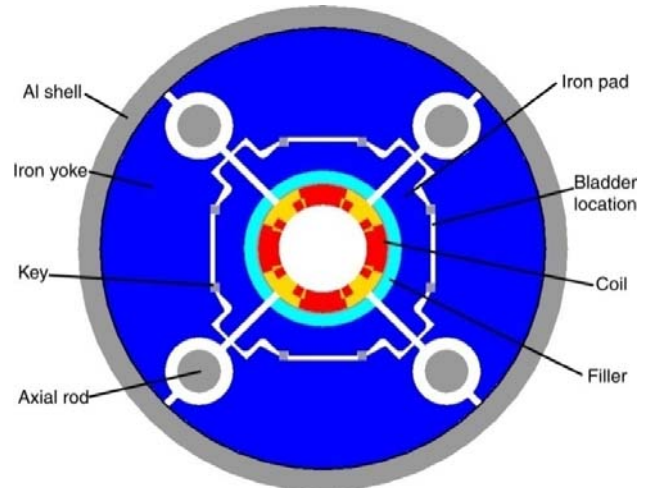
TQS magnet cross-section showing coils, fillers, pads, keys, yokes, shell and axial supporting rods.
